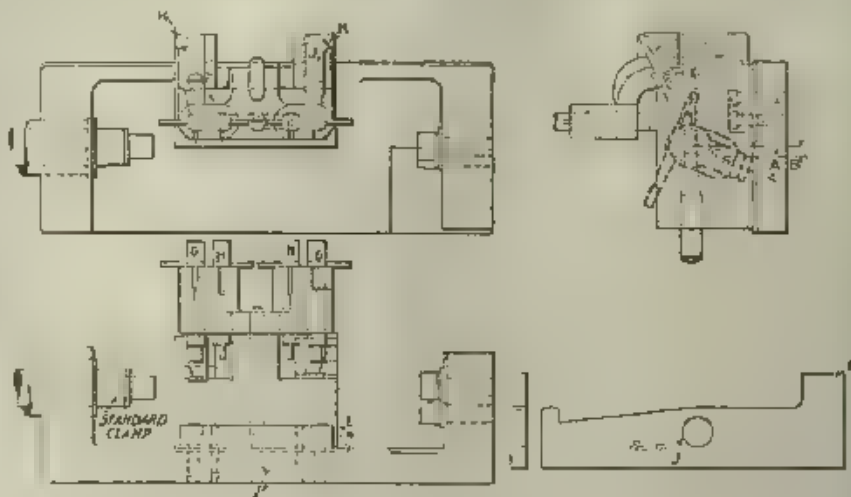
DEPTH AND POSITION GAGE FOR EJECTOR CLEARANCE CUT
